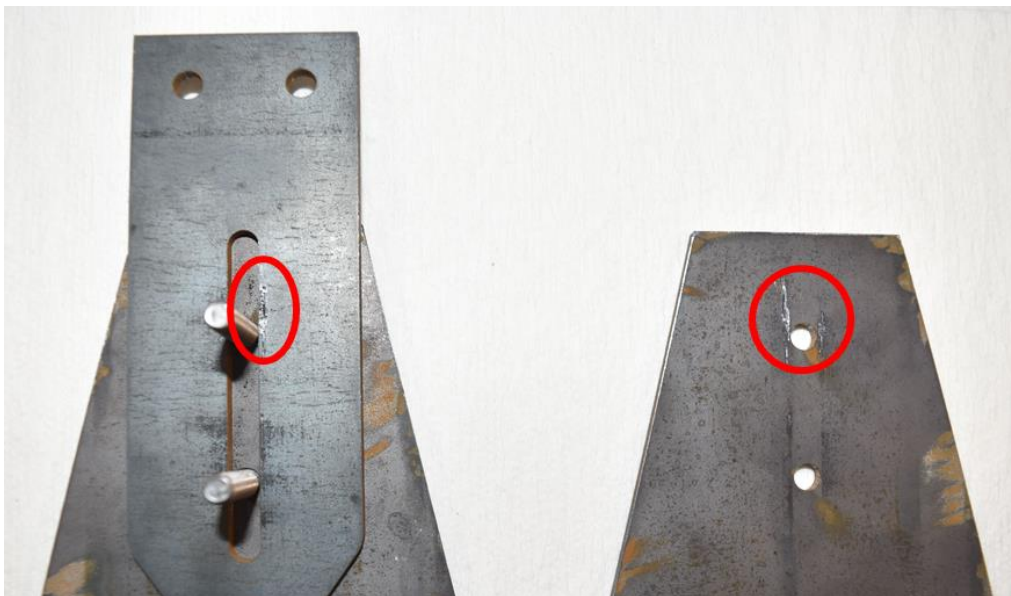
Disassembly of components showing wear on the contact surface (circled in red).
